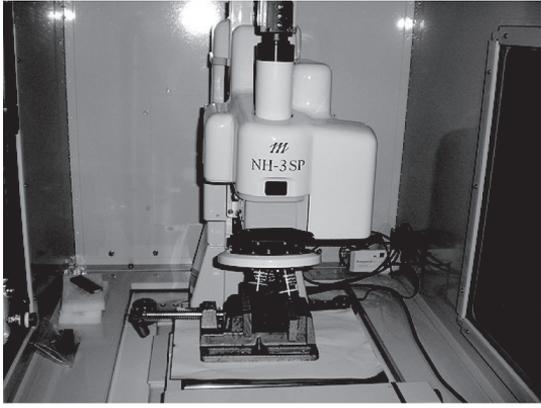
Non-contact three dimensional measurement device NH-3N (Mitaka Kohki.Co., Ltd.)
